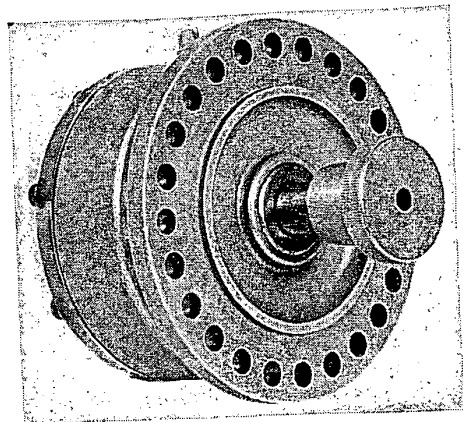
Planocentric gear, 64:1 ratio, oblique low-speed end. (Courtesy of General Electric Co., Lynn, Mass.)
